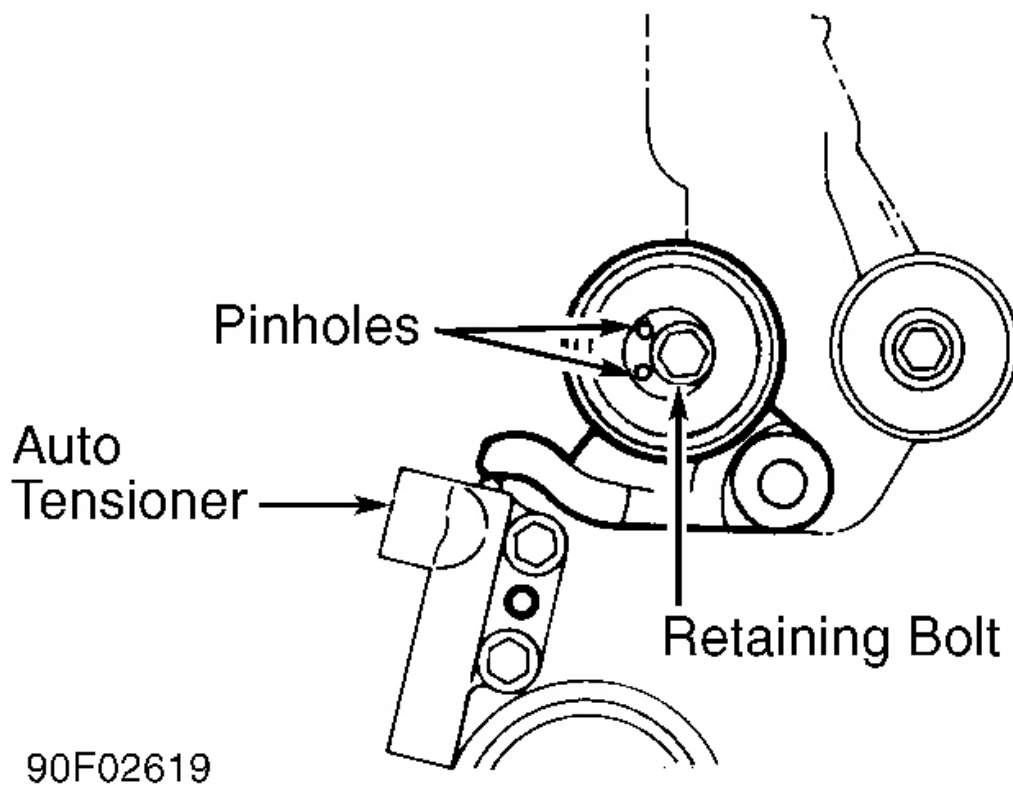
Positioning Tensioner Pulley Pin Holes Installation
